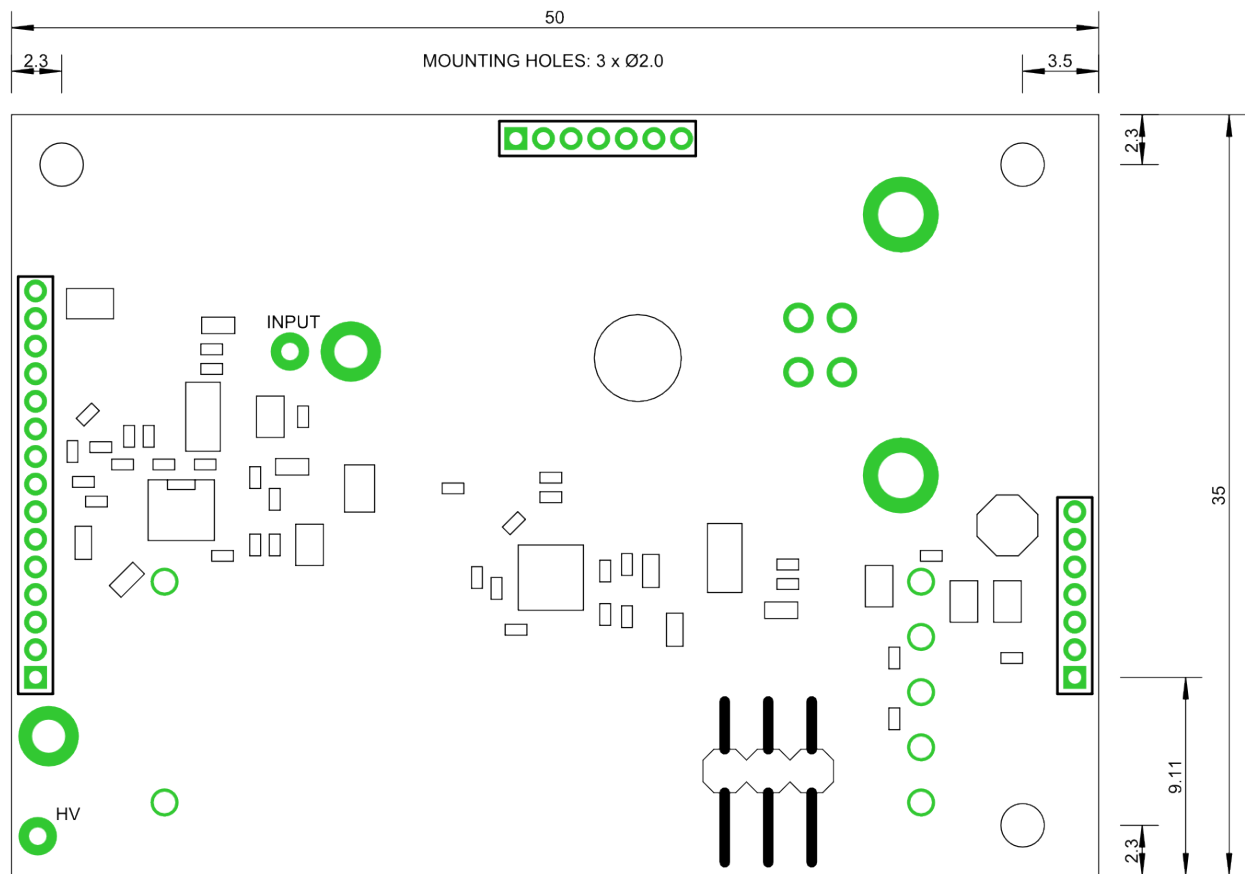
Outline Dimensions (Top View, all Dimensions are in Millimeters)
